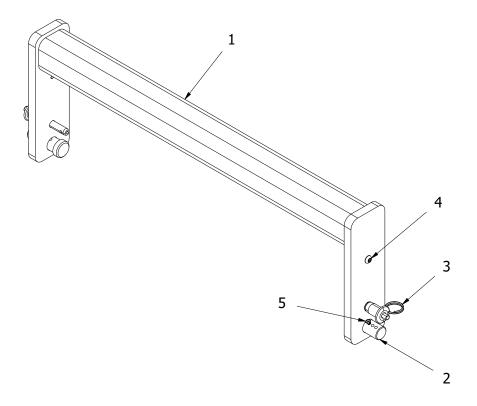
AGSE-E26288-S01 Blocker Assembly
